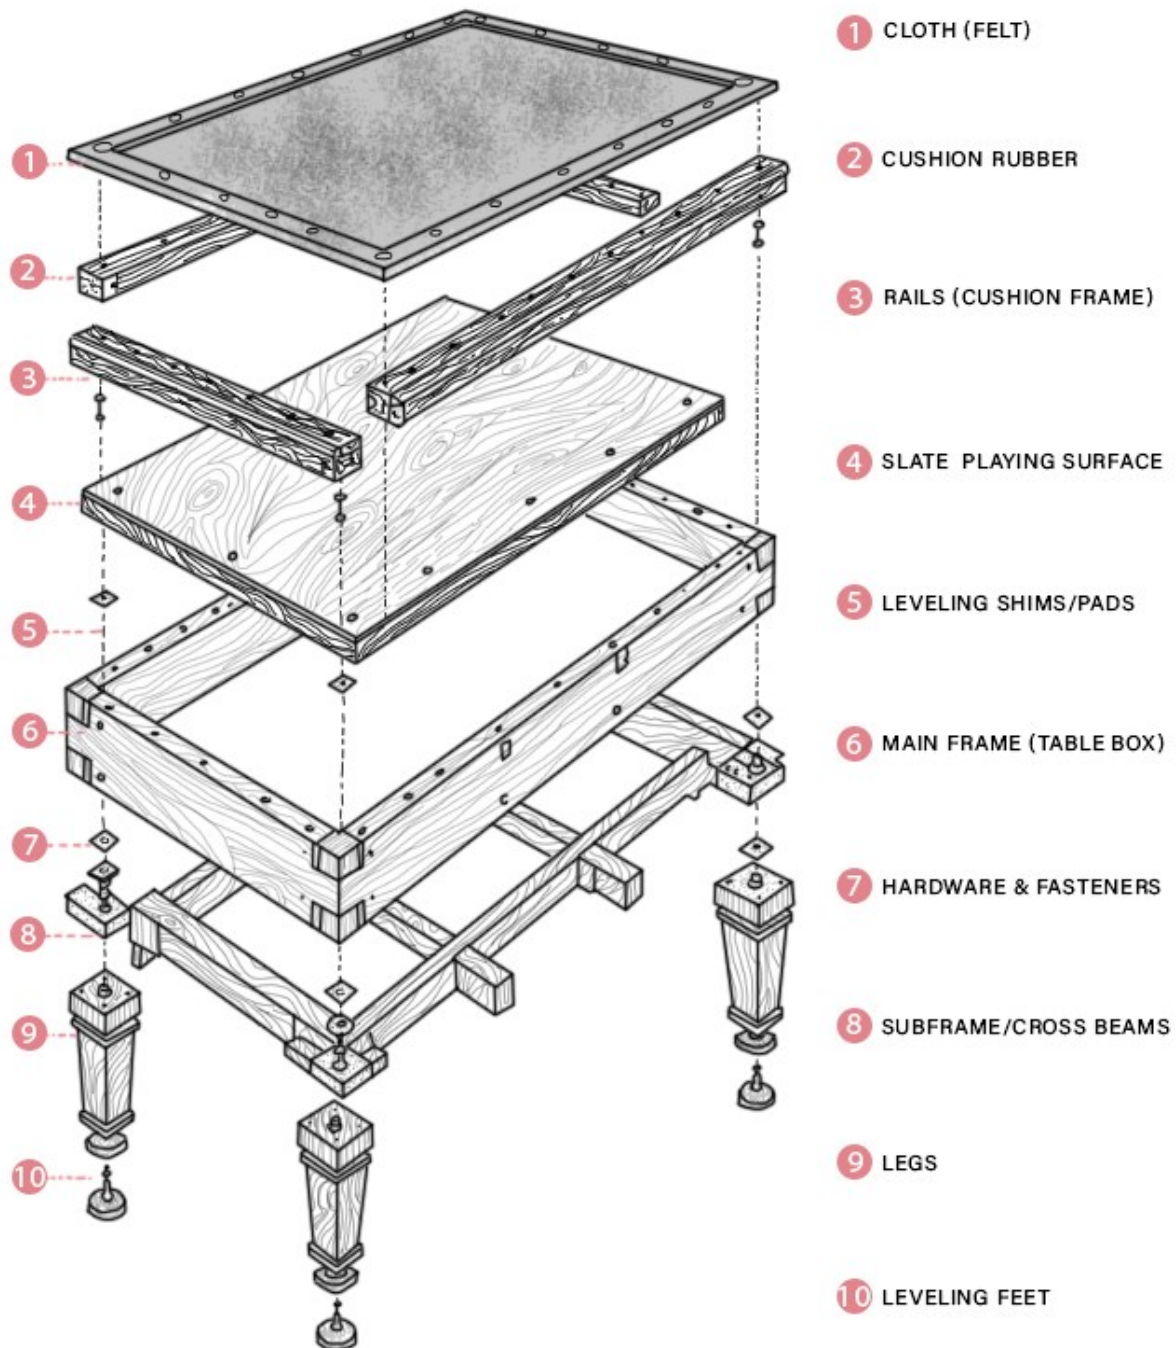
Exploded View of a Typical Carambole Billiard Table and the name of its Components
